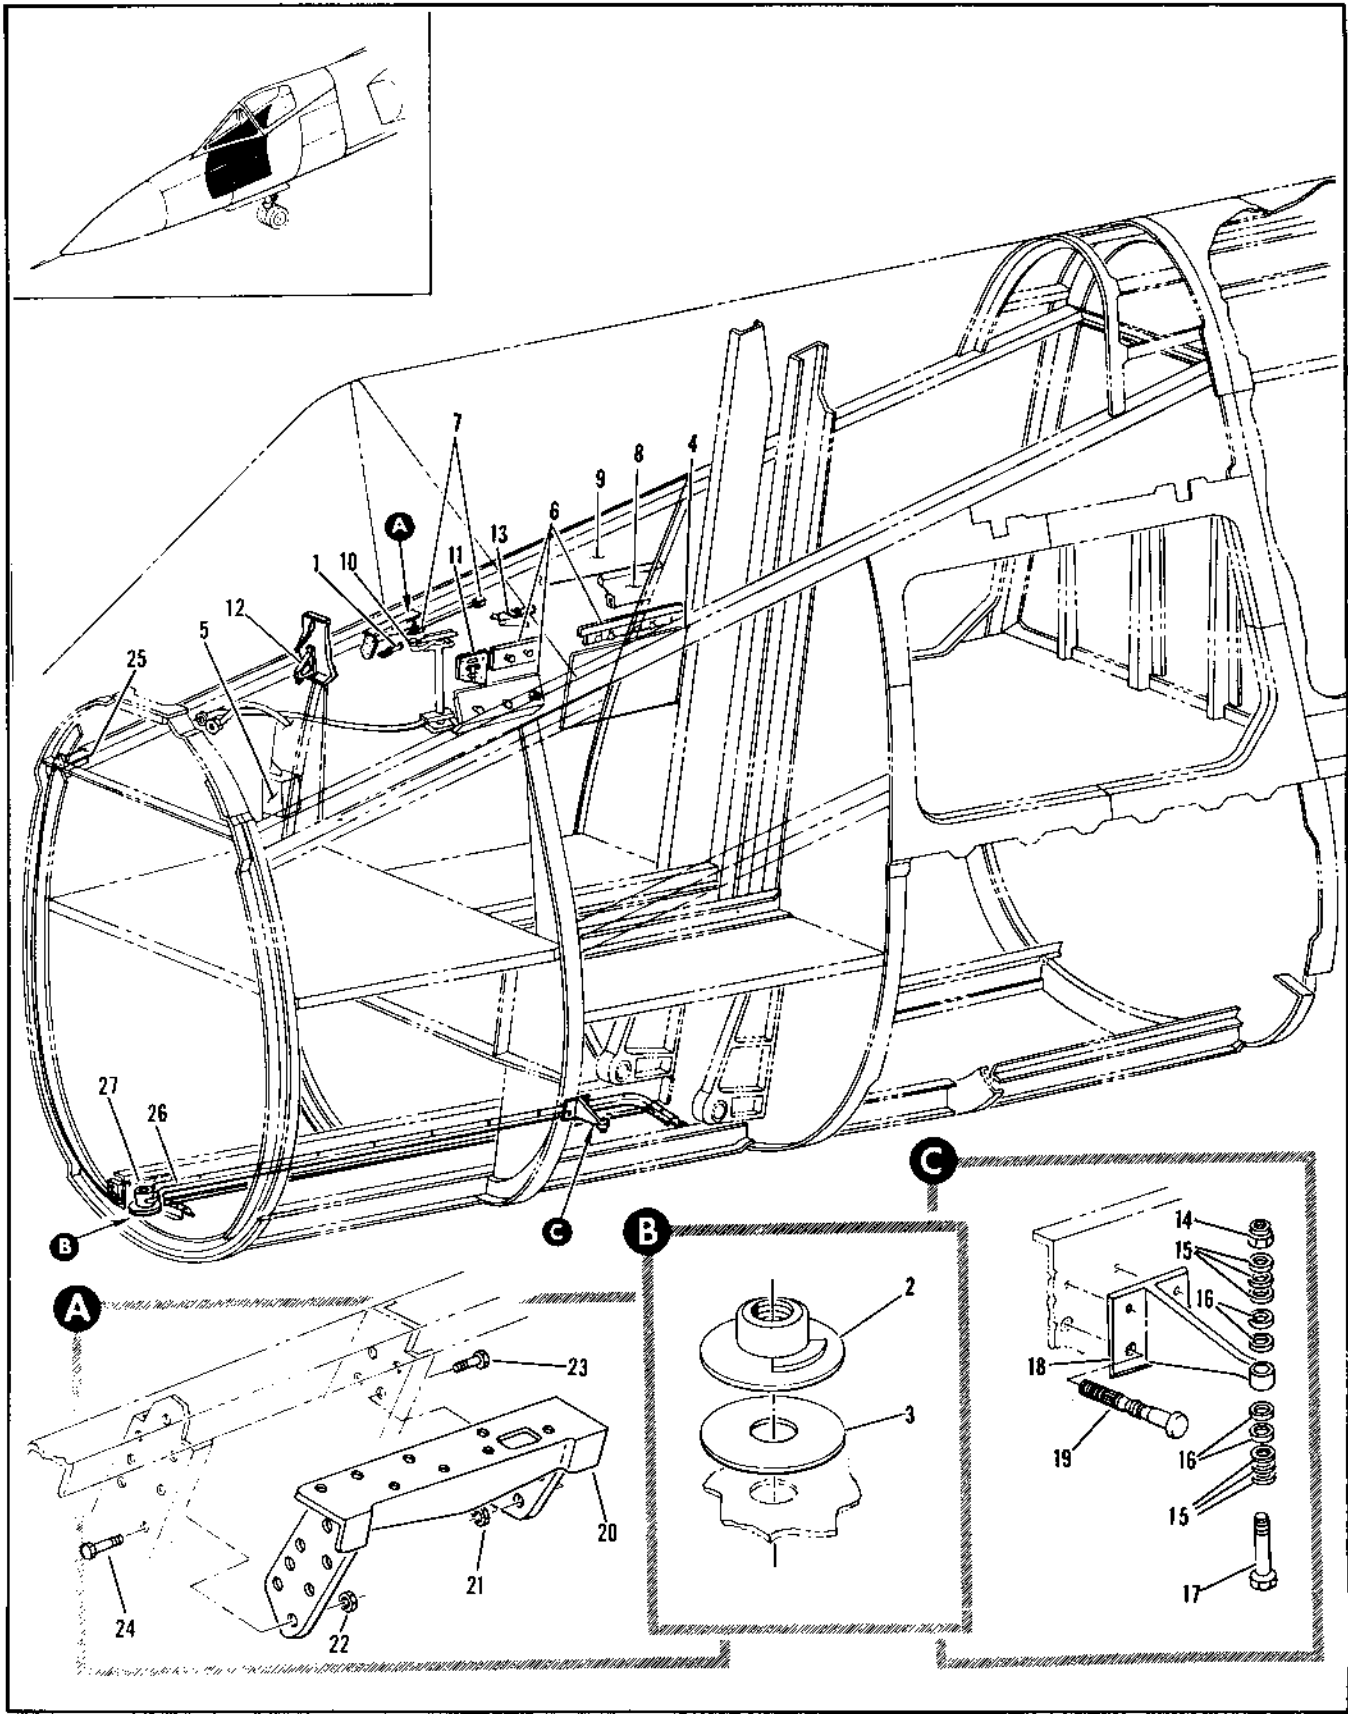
RH Side Panel Equipment Assembly Sta 102 to 172
